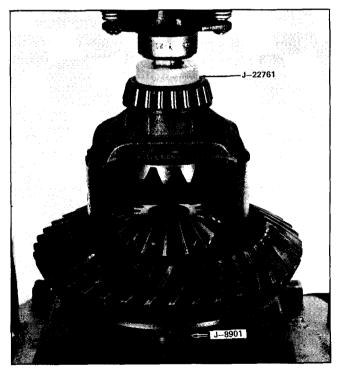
A-24 Installing Right Differential Side Bearing - B Series
